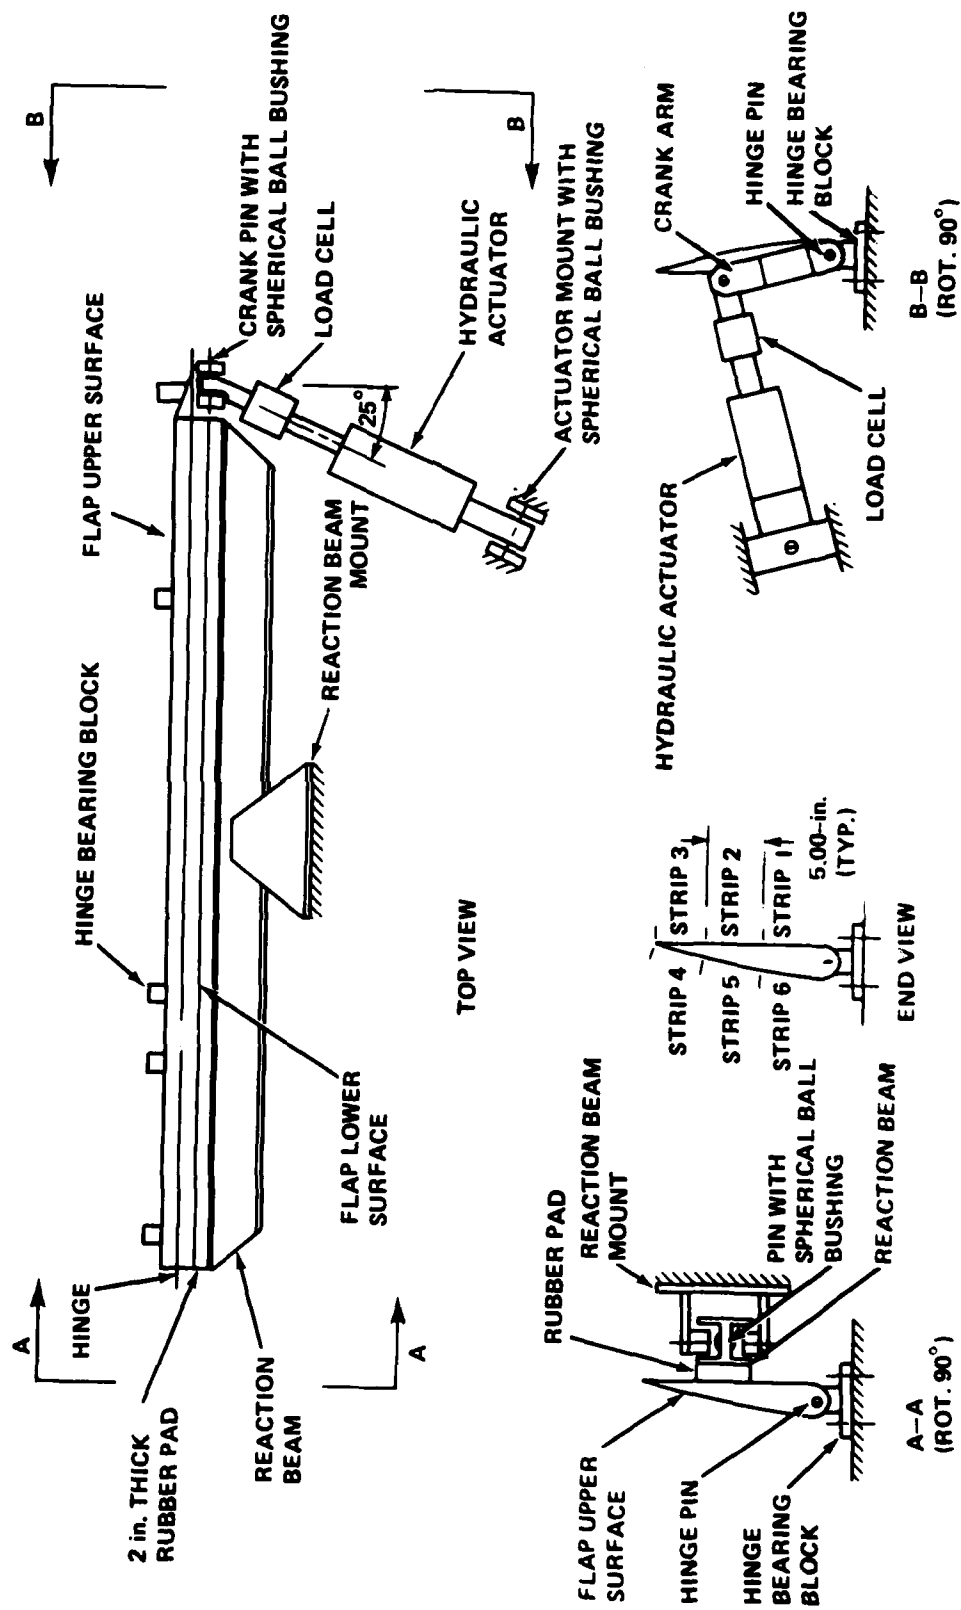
Flap Assembly in Test Fixture for Calibration Test
